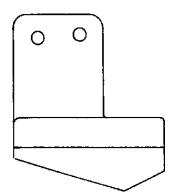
Blade Type Tooth Retained with roll pin or cotter pin. Remove pin, then remove tooth. Install new tooth and pin. DO NOT hit carbide face with hammer.
